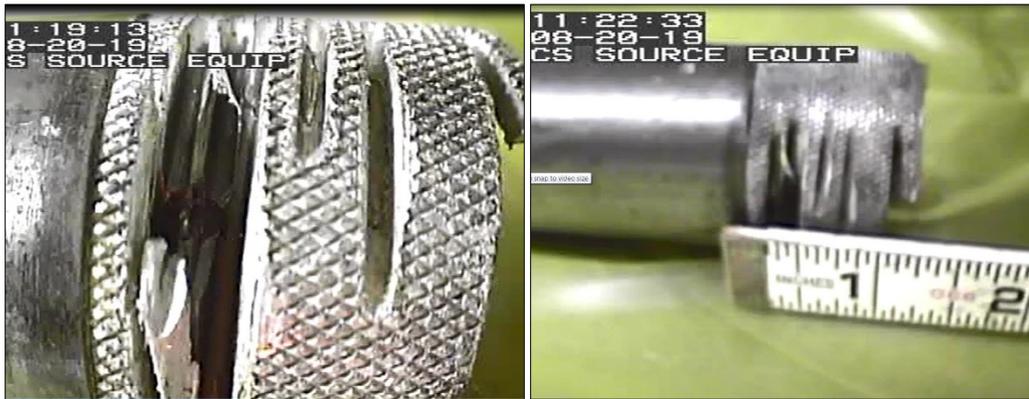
Cuts in the Vicinity of the Roll Pin – View 1 (left) and View 2 (right)
